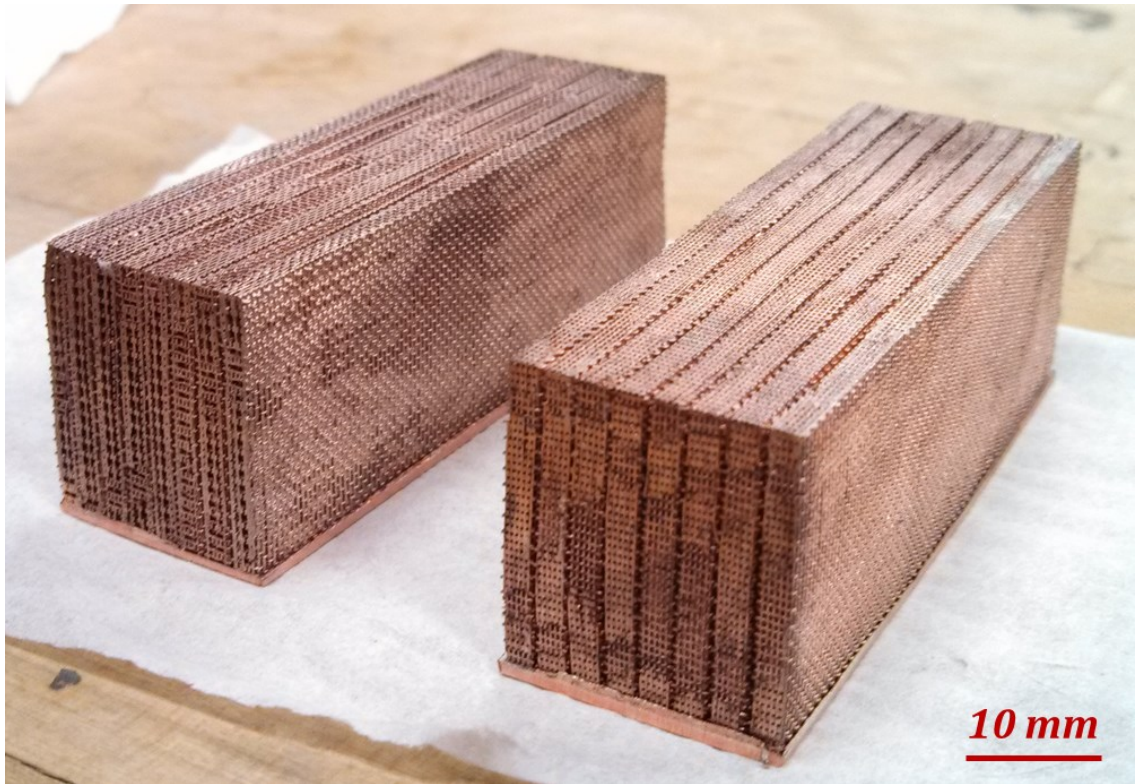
25.4 mm x 25.4 mm x 76.2 mm (warp x fill x z) multilayer woven and brazed copper blocks. The optimized block is shown on the left and the standard pattern block is shown in the right. Both samples were brazed to a 1 mm thick OFHC copper face sheet after the initial brazing process (which was used to bond the layers together).
